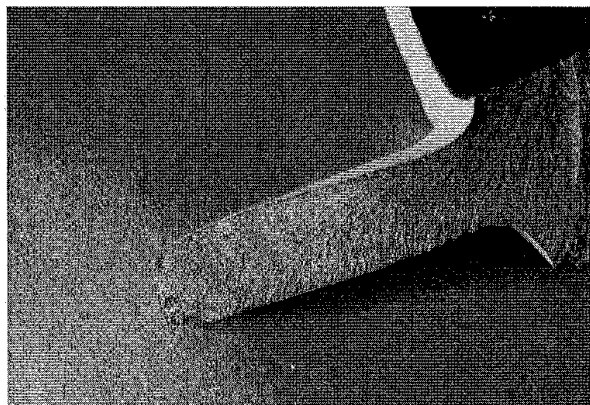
Possible very coarse beach marks on fracture surface "A".
